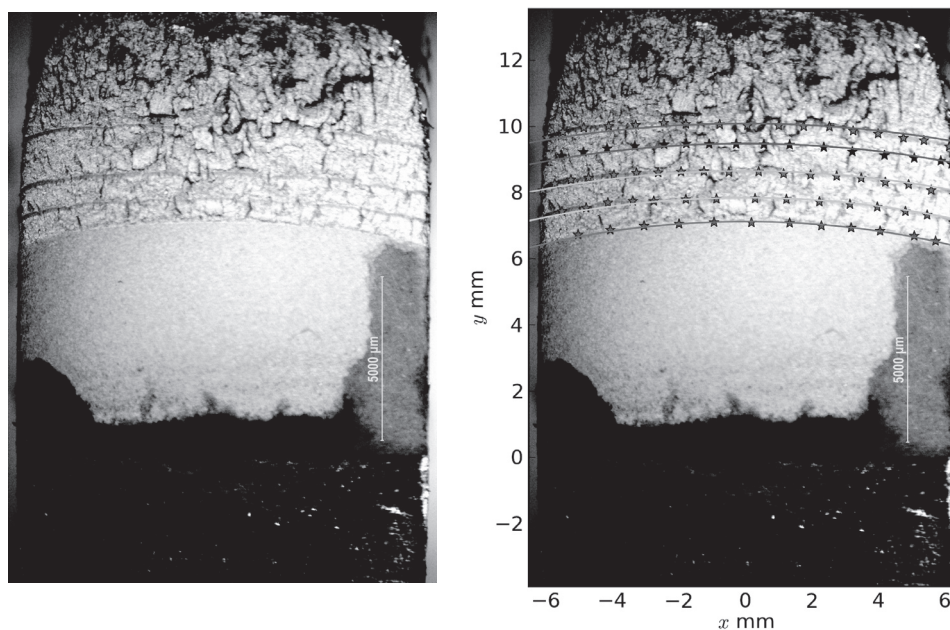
The fatigue crack surface of specimen $B=12.5$ mm, $F_{\max}=18.75$ kN.
